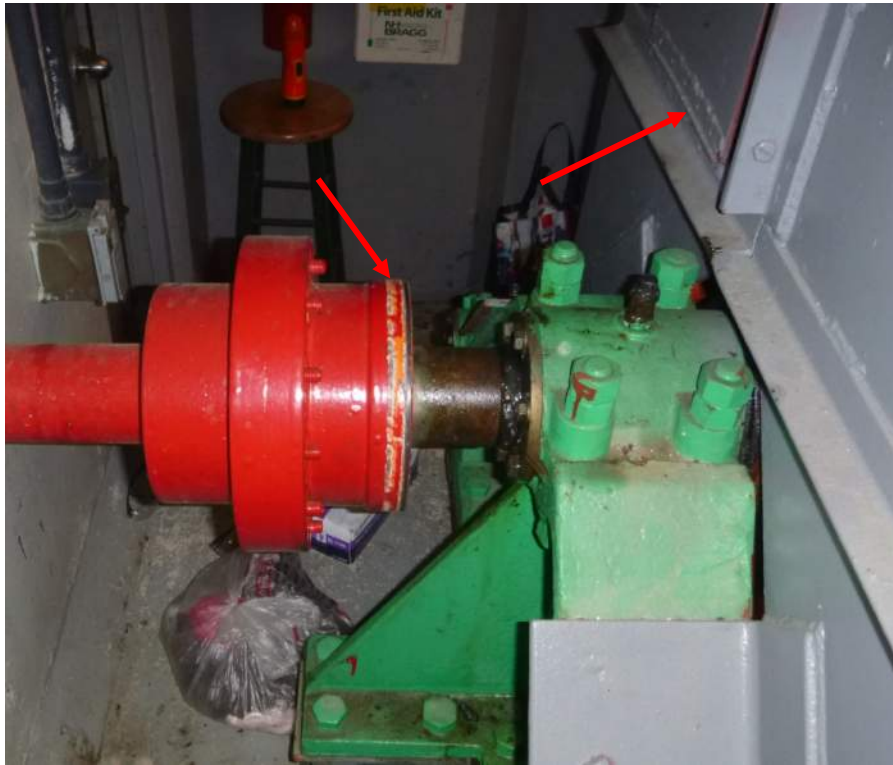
The machinery coupling from the primary open gear set is scored from the maintenance hatch on the housing for the open gearing.
